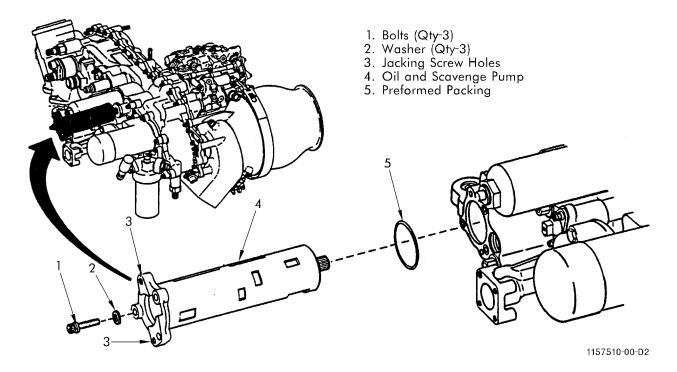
Oil and Scavenge Pump; Removal and Installation
